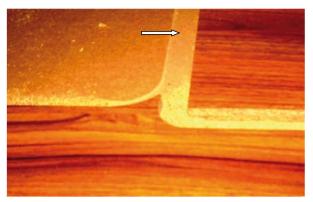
Top plate after cutting and underlay with traces of milling cutter
